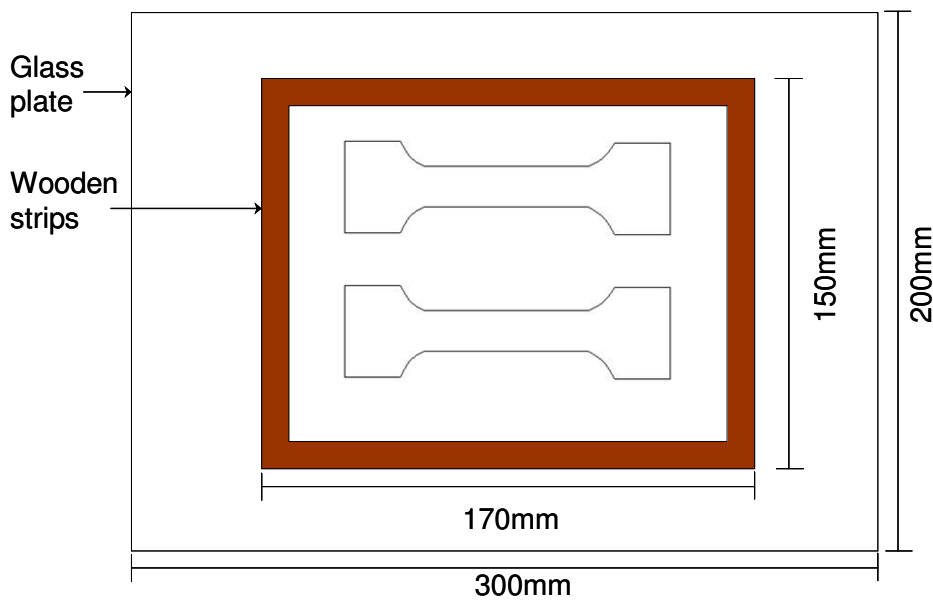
Schematic illustration of the assembly used for fabricating the mould for casting the neat-resins samples.
